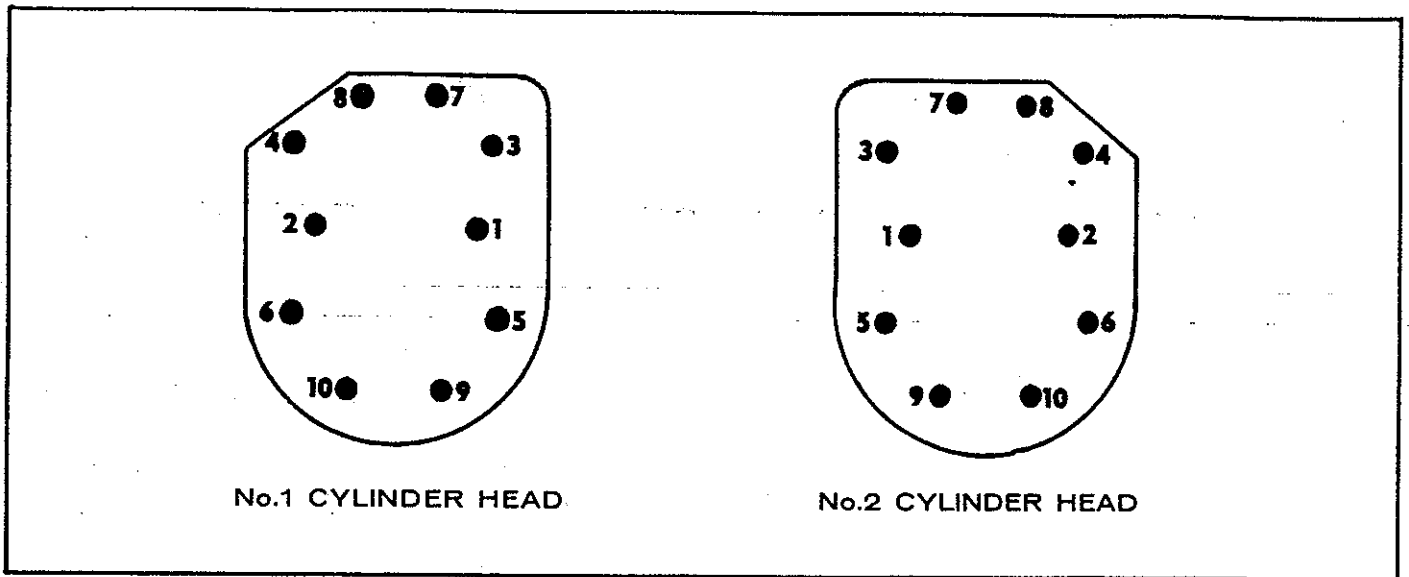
HEAD BOLT TIGHTENING ORDER
